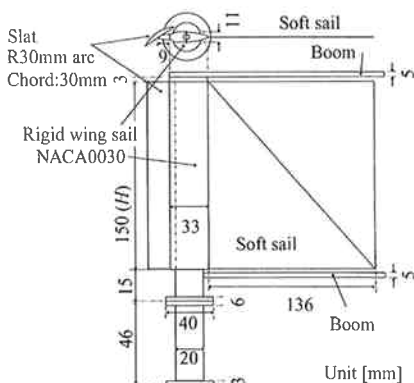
Plan and side elevation of the model scale hybrid-sail
